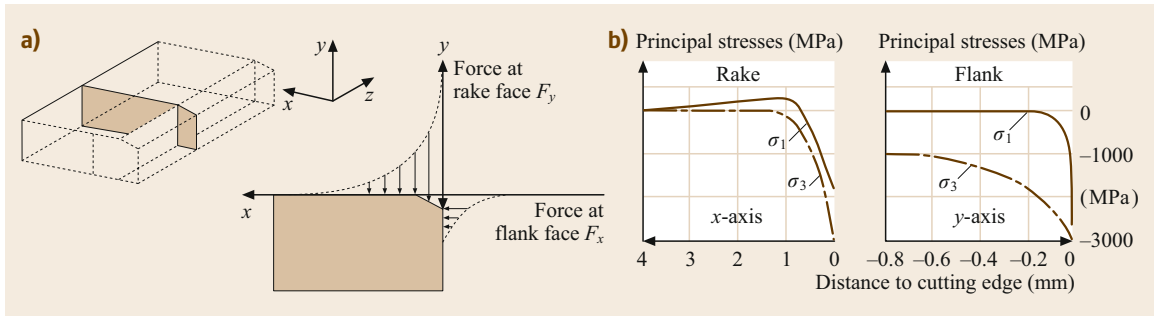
,b Load distribution due to mechanical stress perpendicular to the major cutting edge. (a) Surface forces beneath the rake and flank face surfaces; (b) principal stresses at rake and flank face
